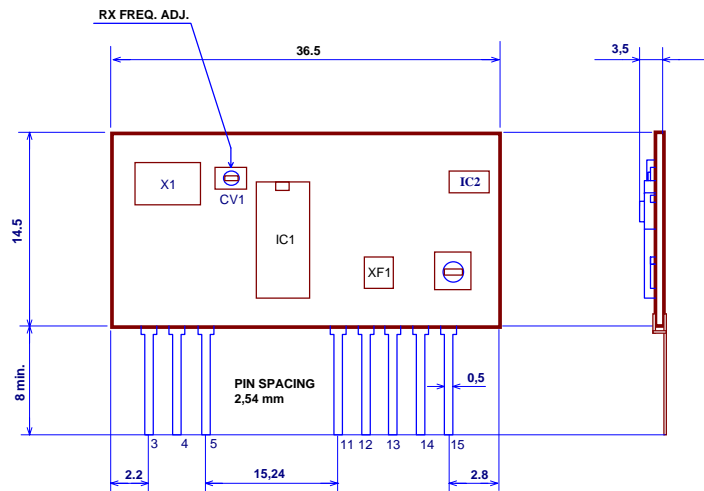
BR57 S - PHYSICAL DIMENSIONS.
